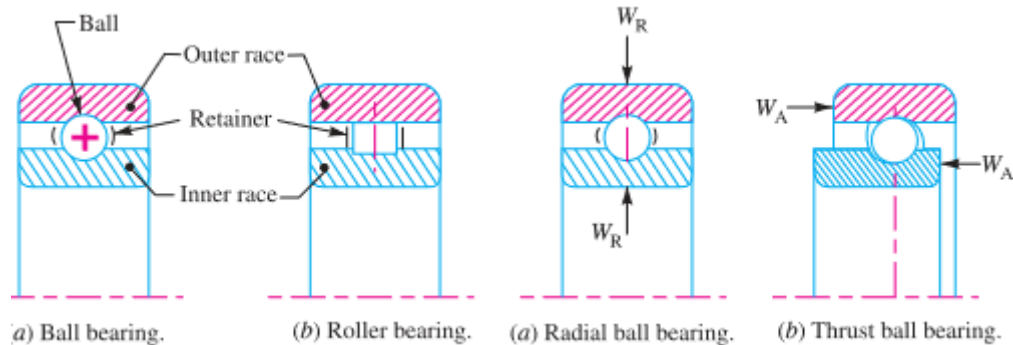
Ball and roller bearings and Radial and thrust ball bearings.
